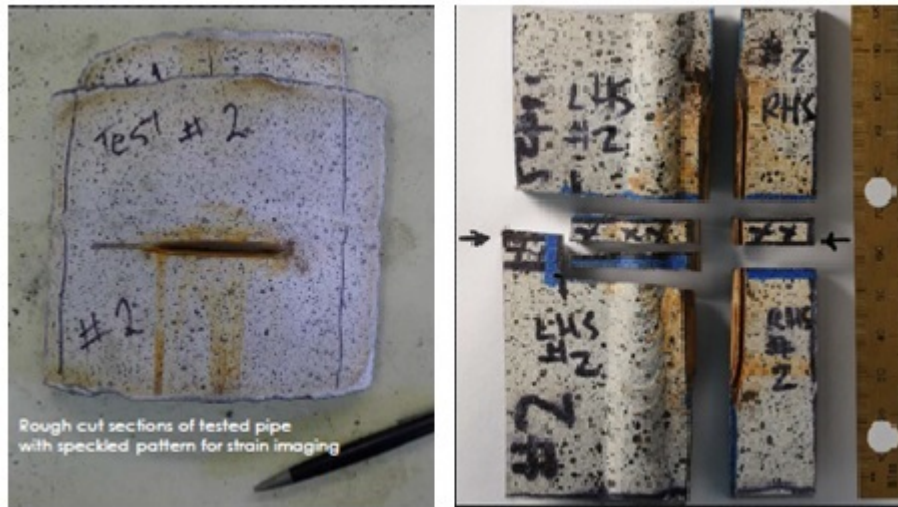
Flaw after the rupture (left hand side) and the location of the fractography specimen (right hand side)
